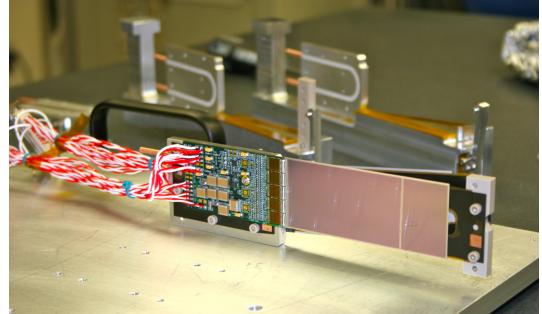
A prototype module assembly (foreground) with the 50 mrad (left) and 100 mrad (right) module assembly fixtures in the background. A pair of cooling blocks and a spacer block can be seen on the fixtures.
